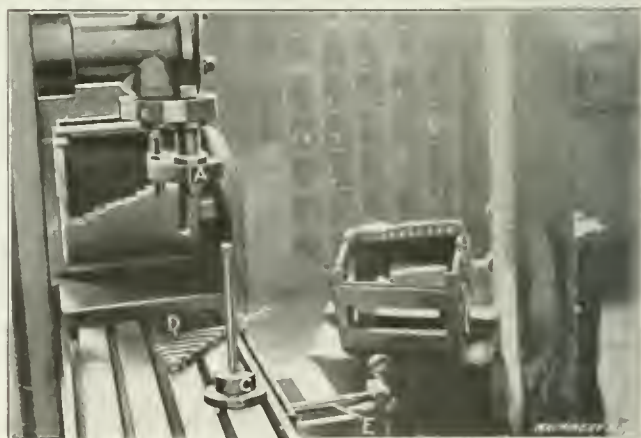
Fixture, Extension Mill and Plugs used in Machining the Lever Steps of Change-gear Box
